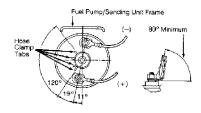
Installing Fuel Pump (MPV) Courtesy of Mazda Motors Corp.
